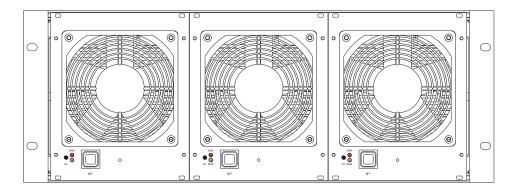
Front View of a Fully Equipped M 3421 Subrack
